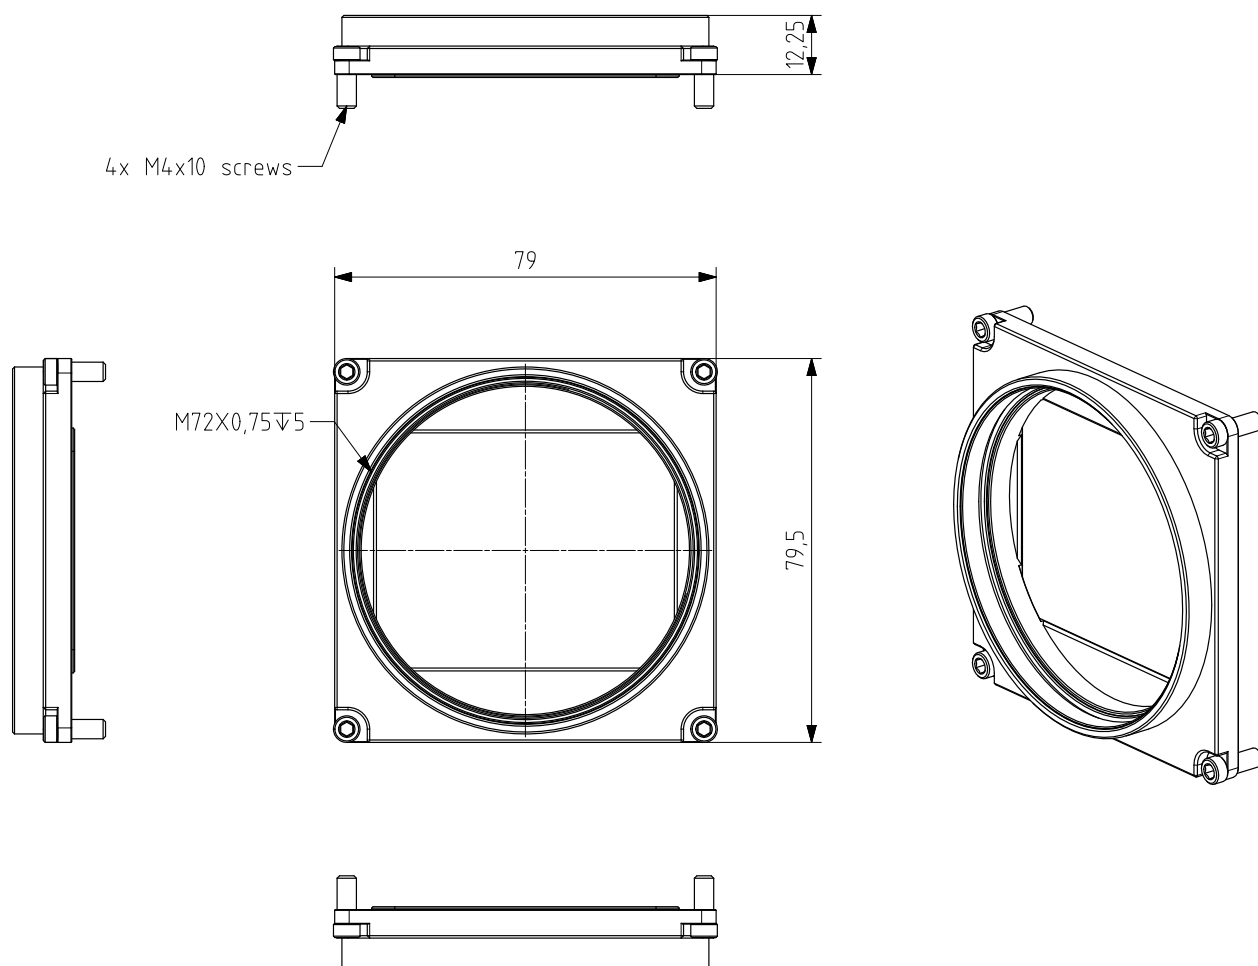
Dimensional drawing of ME-LA-80MM-M72-L
